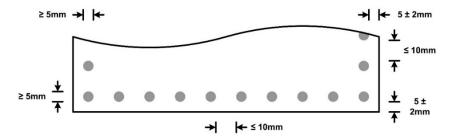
Standard One-Piece Letter Mailer - Spot Weld Requirements (Not to Scale)
